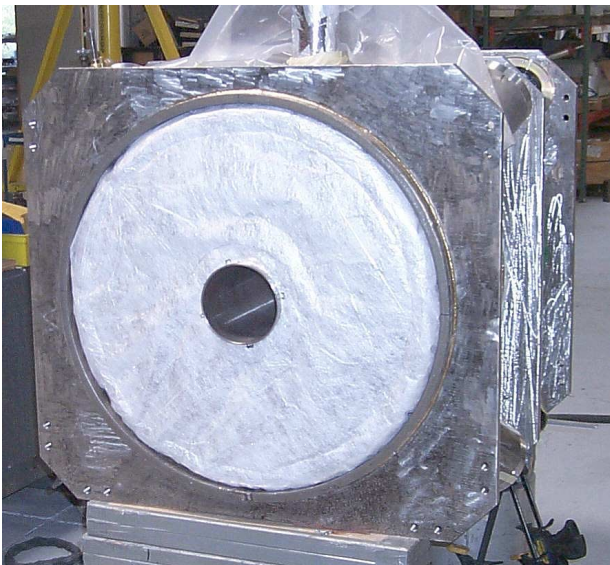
VENUS cryostat with the cold mass and bore tube installed prior to welding on the end caps.
